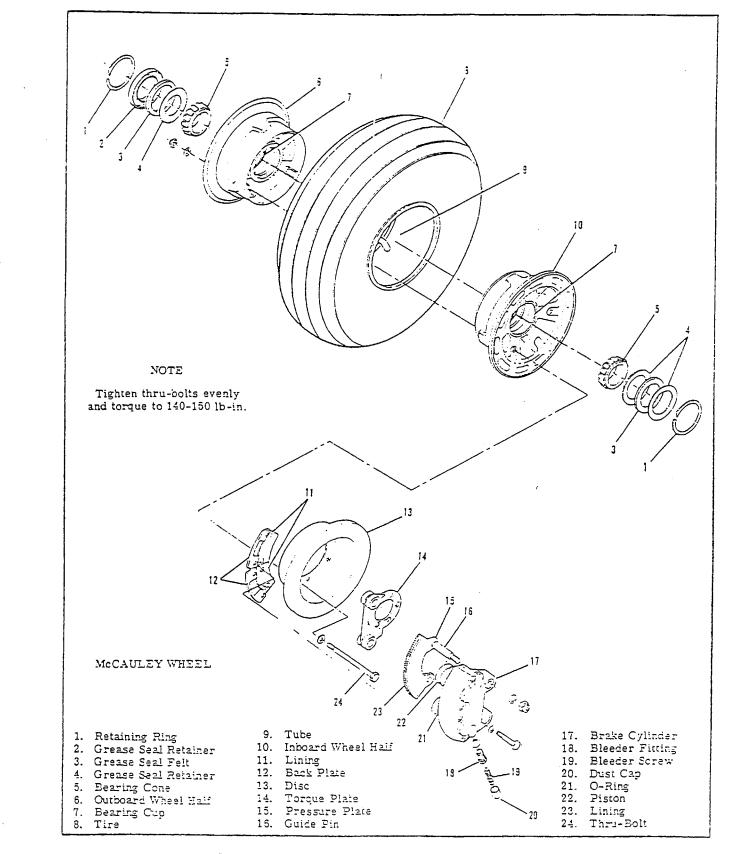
Main Wheel and Tire Assembly (Sheet 2 of 3)
